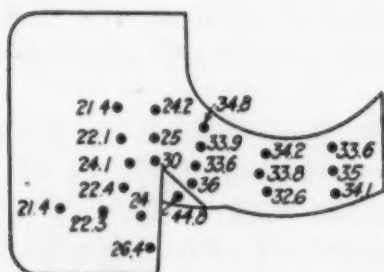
Hardness Induced by Tool in Mild Steel (5 x). Showing Wedge Built Up on Cutting Edge of Tool. Depth of Cut is 0.037 In., Speed 65 Ft. Per Min. (E. G. Herbert.)
